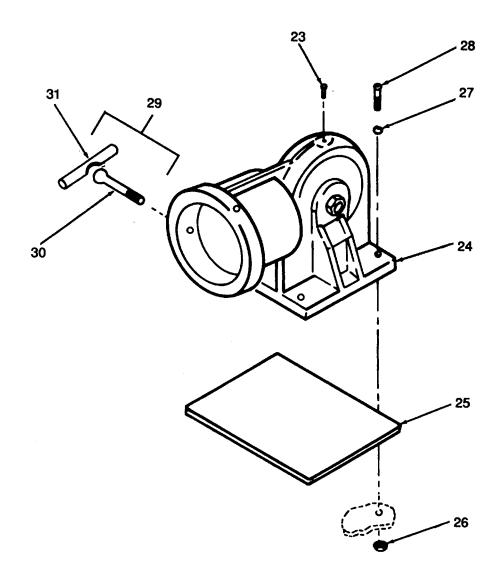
Fixture Assembly (Sheet 3 of 3).
